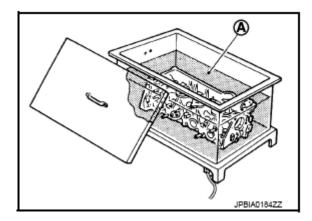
Heating Cylinder Head Courtesy of NISSAN NORTH AMERICA, INC.
